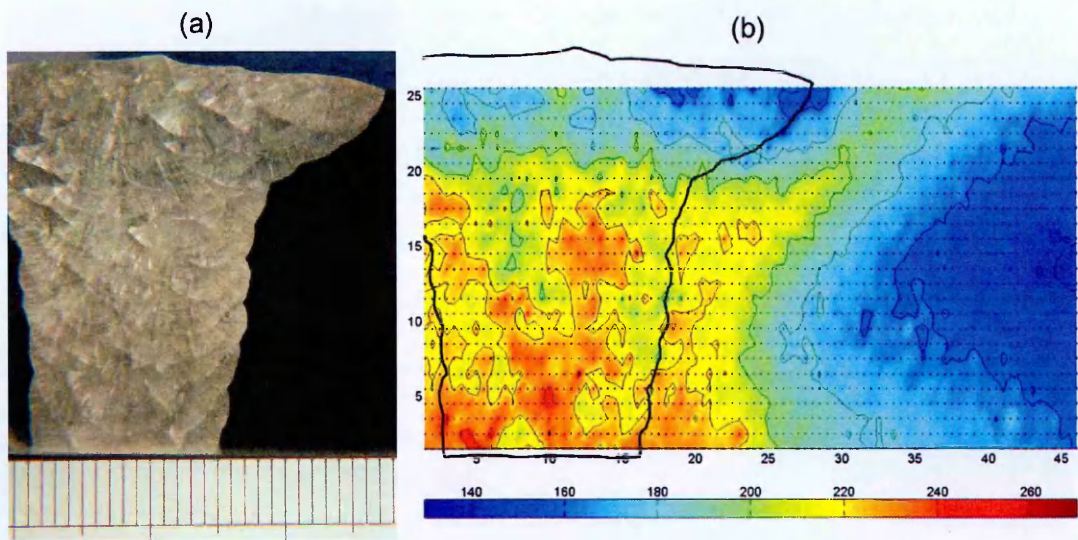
(a) Weld macrograph and (b) Hardness map of MU4-3 mock pipes.
